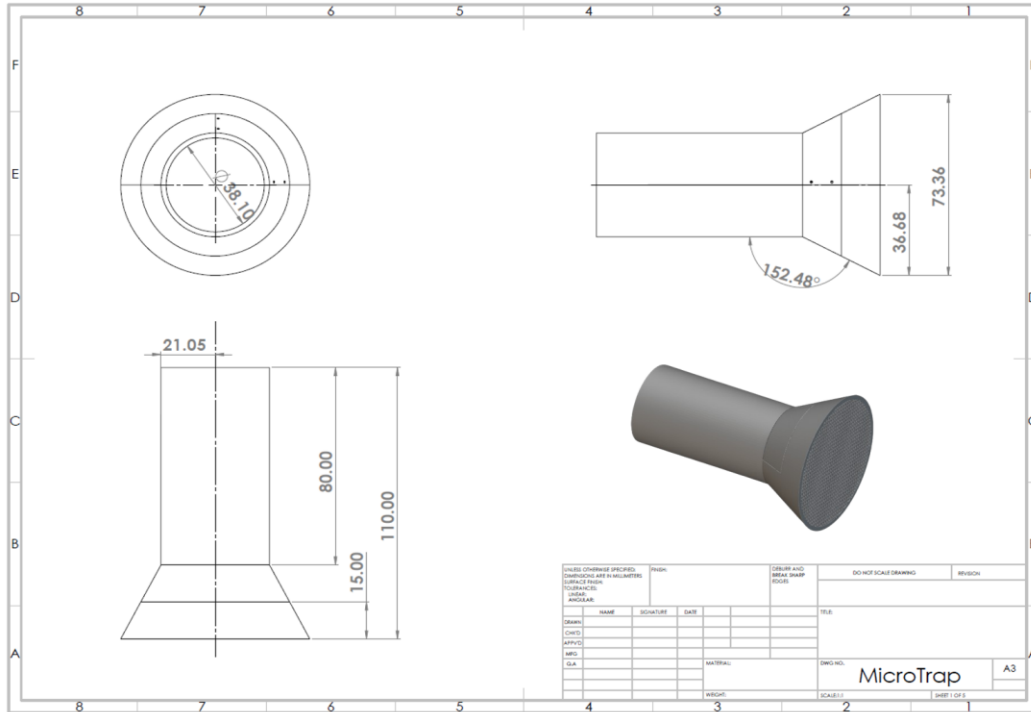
Technical drawings showing critical dimensions of the MicroTRAP (all dimensions are in *mm*).
